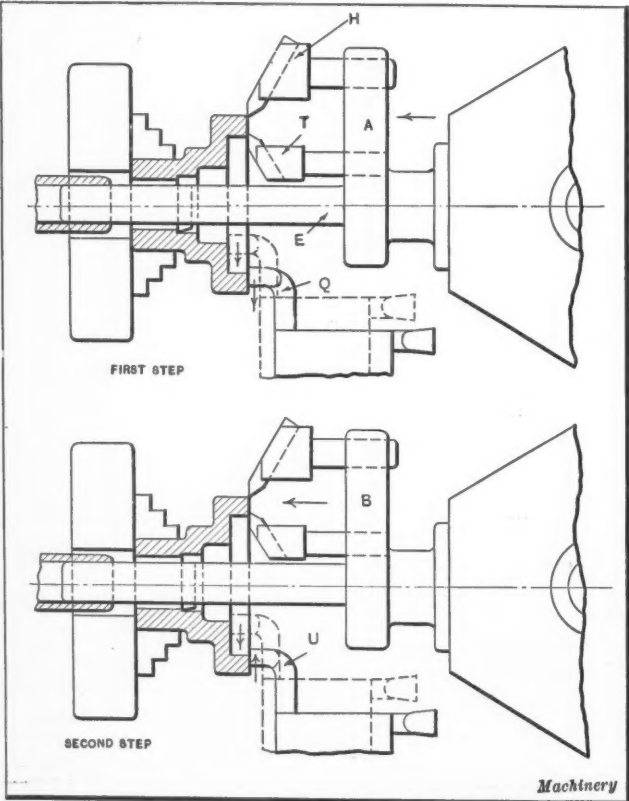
First and Second Steps in which Certain Surfaces of Part C, Fig. 1, are rough- and finish-machined
